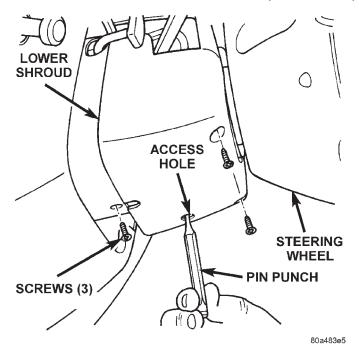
Steering Column Shrouds Remove/Install support bracket studs. Lower the column far enough to remove the upper steering column shroud.
